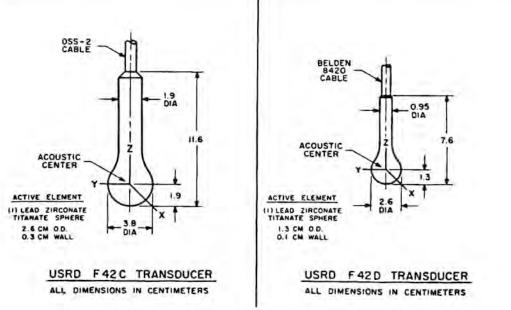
Dimensions (in cm) of Type F42 transducers.
